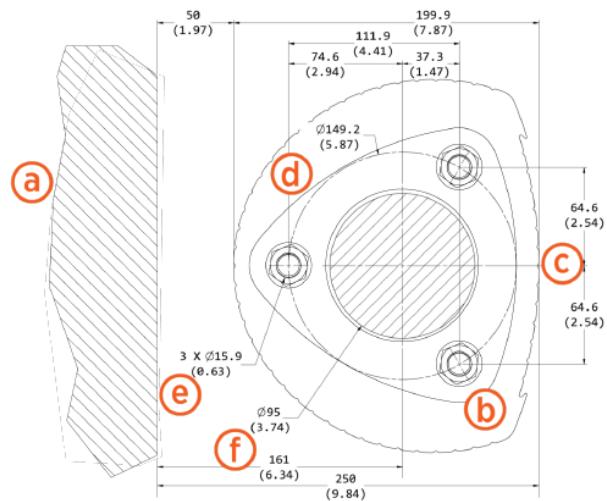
PEDESTAL MOUNTING KIT PARTS
